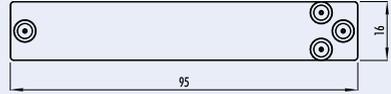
Schematic drawing of the extended size I platform with Luer interfaces
